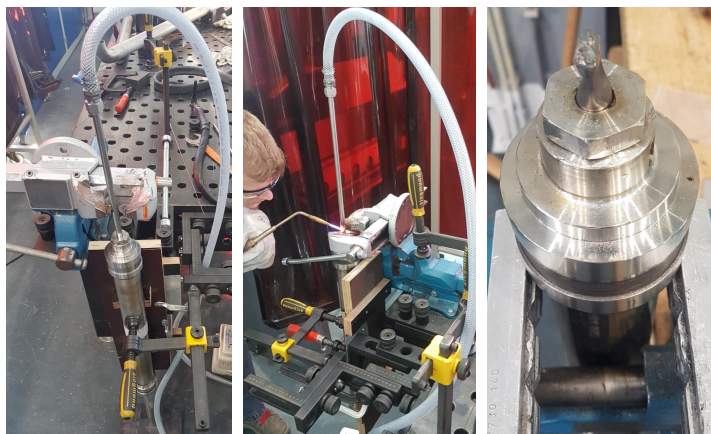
Vacuuming(left), heating and closing using modified vise(middle) and result after welding(right)
